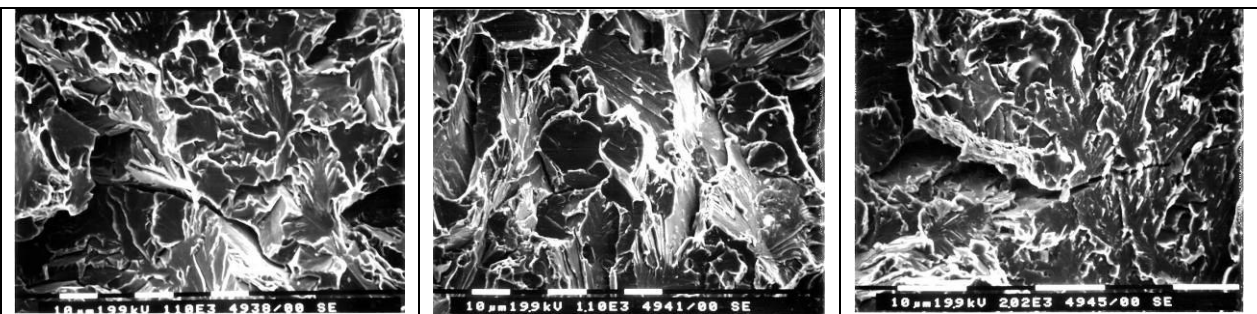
Brittle fracture for HAZ at -190°C for 9.3 mm/s, 12.3 mm/s and 15.3 mm/s welding speeds.
